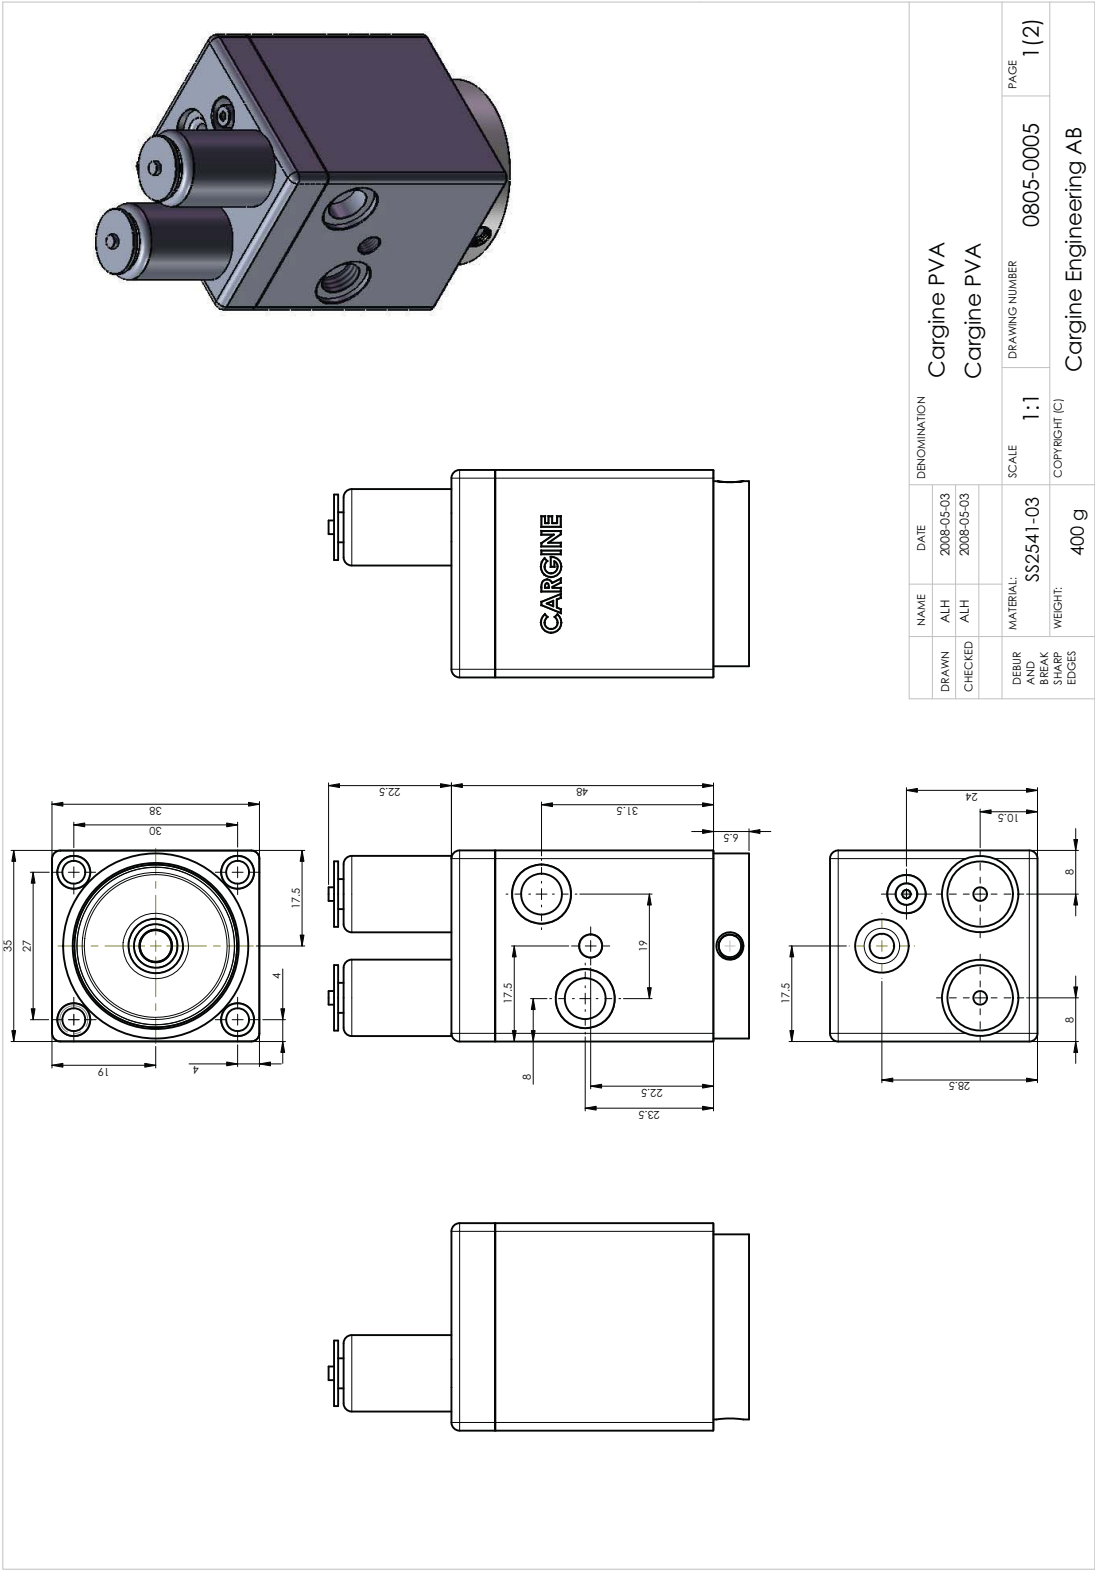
Technical Drawing: Cargine Pneumatic Actuator – Part 1 [45].
